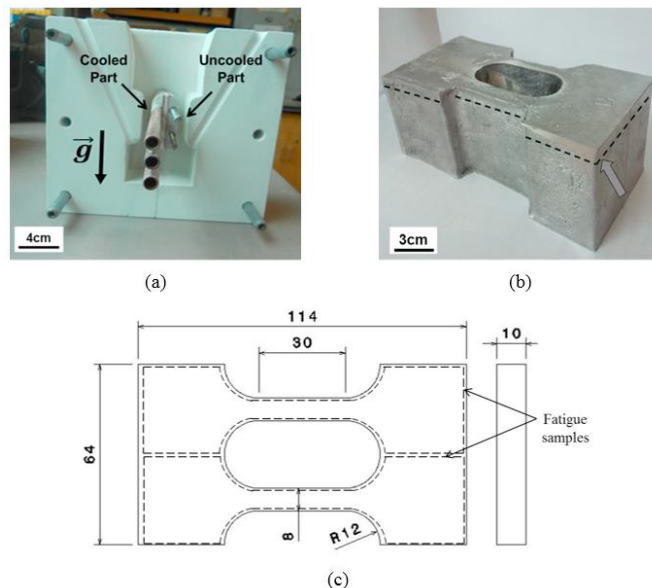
(a) Mold with cooled/uncooled details (b) resultant casting (c) fatigue specimen geometry
